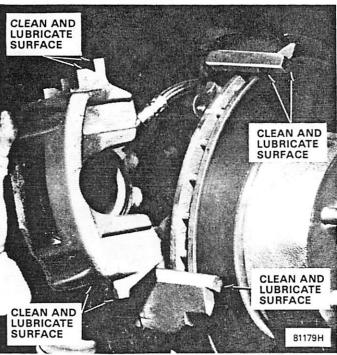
G-50 Caliper and Anchor Plate Abutment Surfaces
